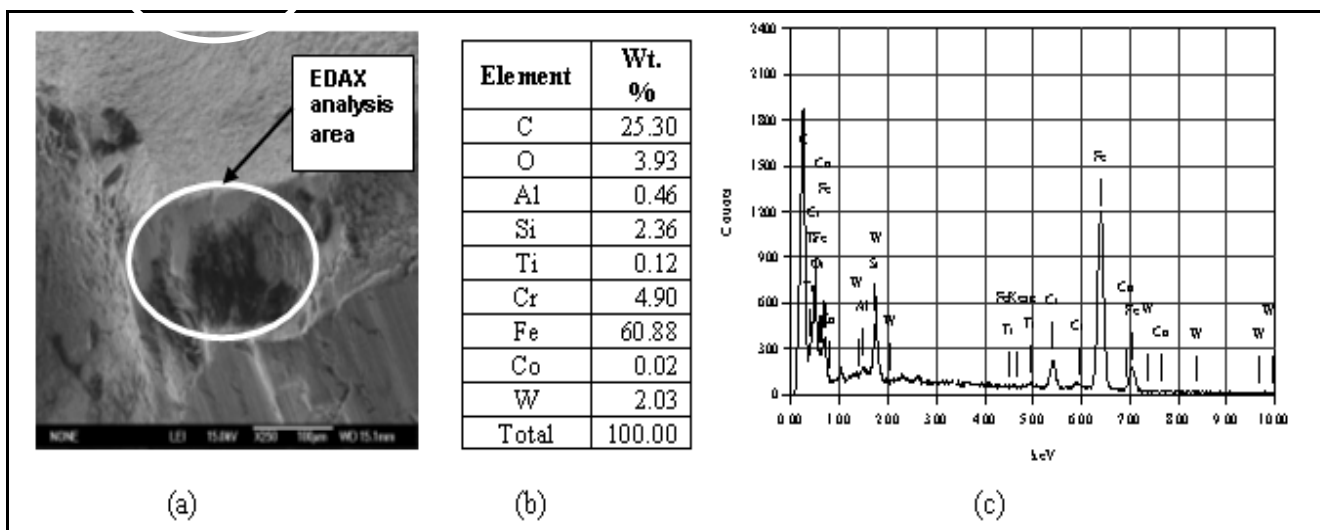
SEM and EDAX analysis of coated carbide for 450 °C PhT machining [v=56.57 m/min, f=0.044 mm/tooth, d=1.00 mm].
